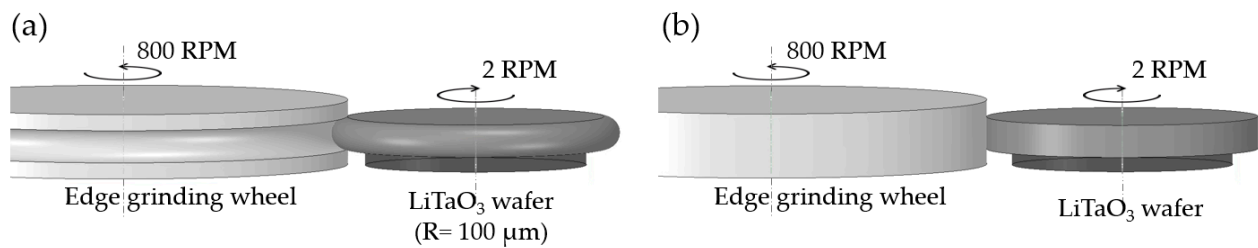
An illustration of LiTaO₃ wafer edge grinding: (a) C-cut edge; (b) Trimmed edge.
